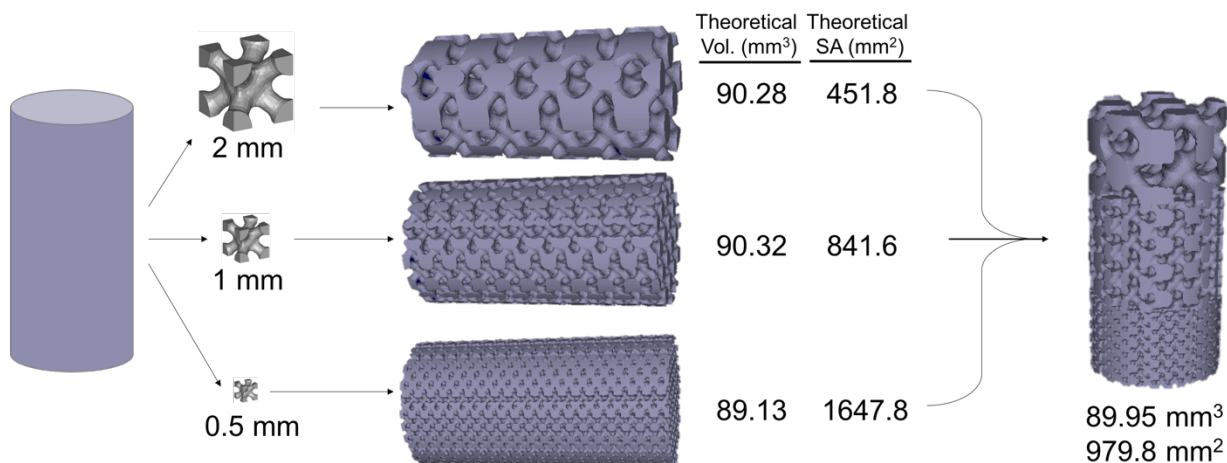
Schematic of CAD generation for geometrically complex devices. A single unit cell of varying sizes (0.5, 1, 2 mm) was arrayed to fill a cylinder (5 mm diameter, 10 mm height) to generate the final structures. A device filled with all three unit cell sizes was also made.
